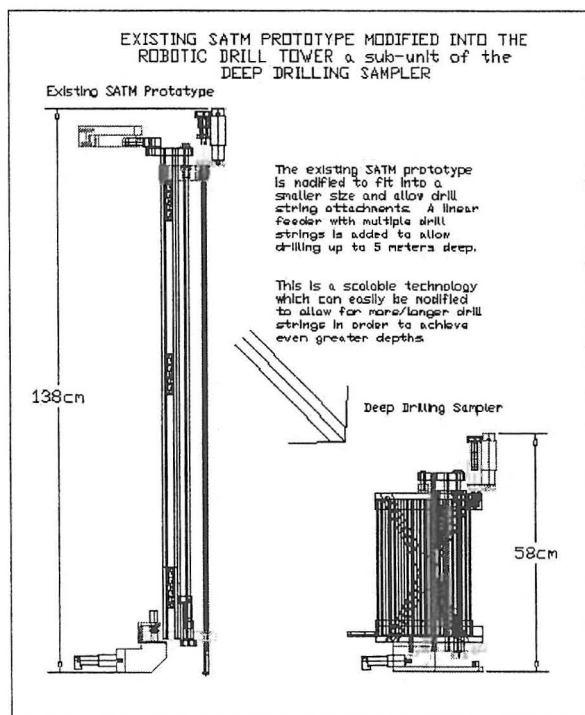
A copy of the existing Champollion/ST4 SATM prototype will be modified into a Robotic Drill Tower capable of accepting drill string segments.
